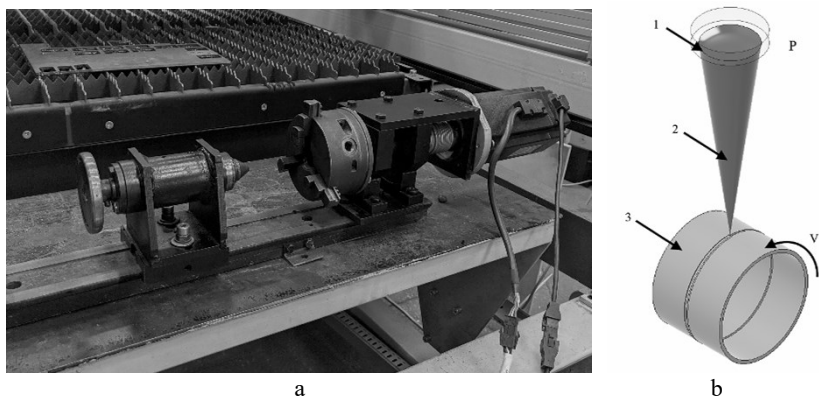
a - Precision rotator, b - Welding scheme on a precision rotator, where 1 – lens, 2 – laser beam, 3 – welded part.
